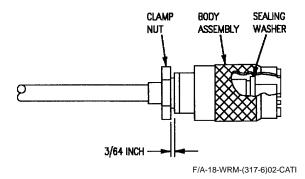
1212-004, 1212-204 and 1212-304 Coax Connector Repair (Sheet 2)
